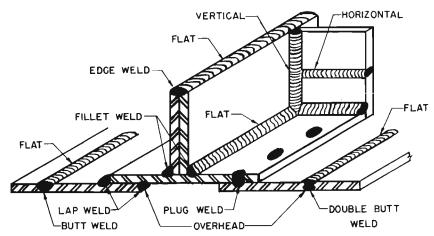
Types and positions of welds. Positions of welds are flat, borizontal, vertical, and overhead.
